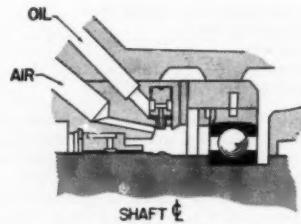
AIRCRAFT GAS-TURBINE BEARING—MIST-LUBRICATED, METERED AT BEARING
